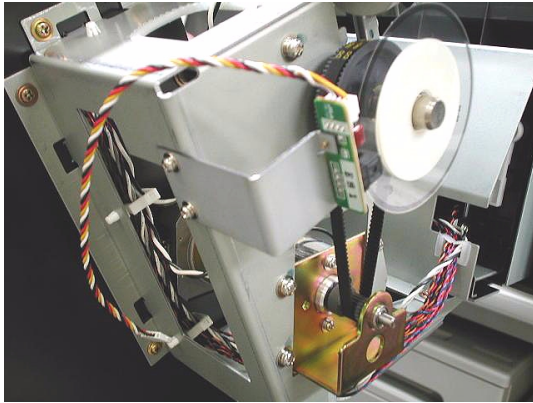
Fig. 4-64. Removing the PF encoder sensor.
